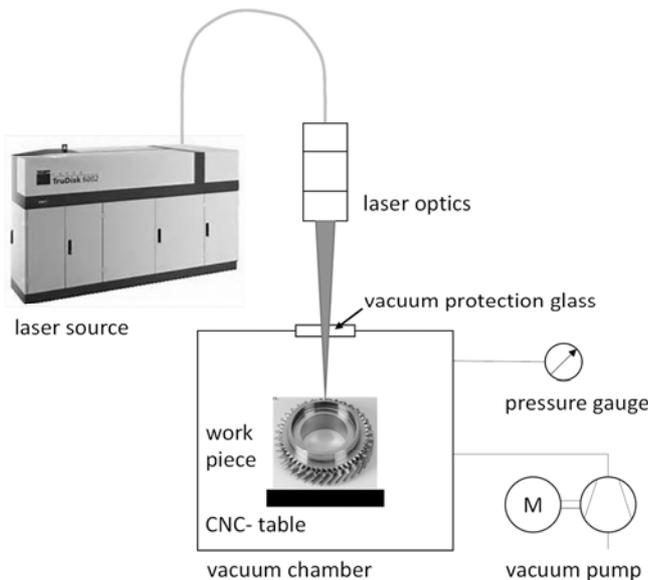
Basic setup for laser beam welding under reduced pressure
